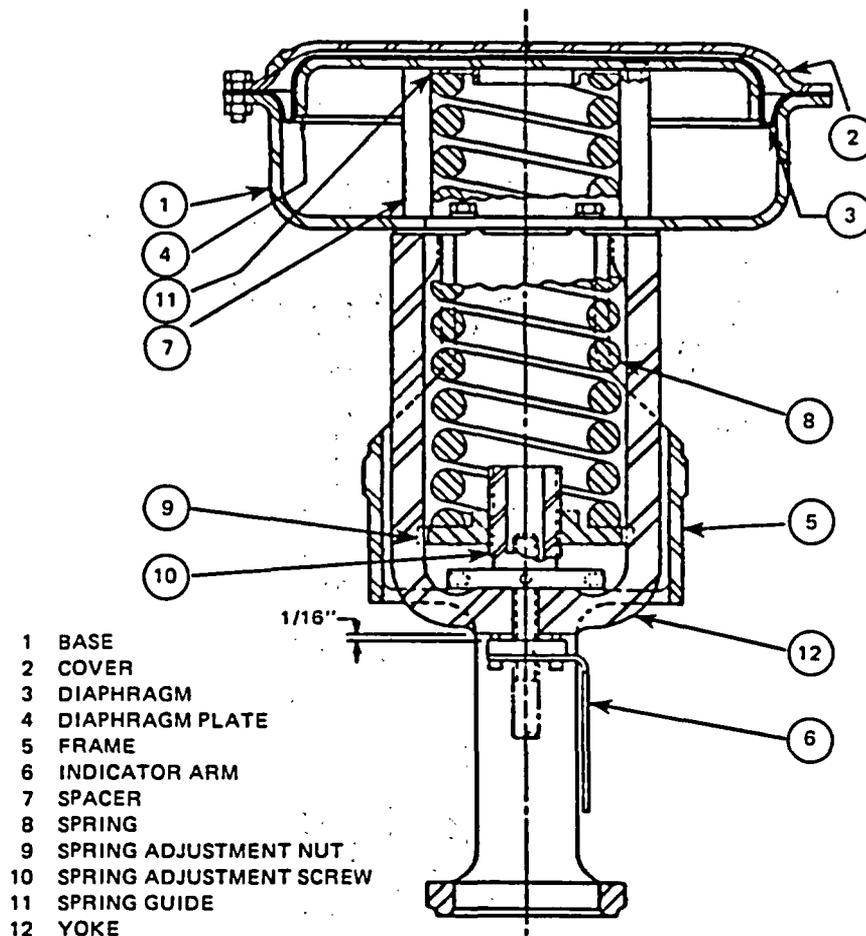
Operator assembly for air-operated (spring-loaded) relief valve — part No. 7 on Fig. 6 (Courtesy of Copes-Vulcan)
